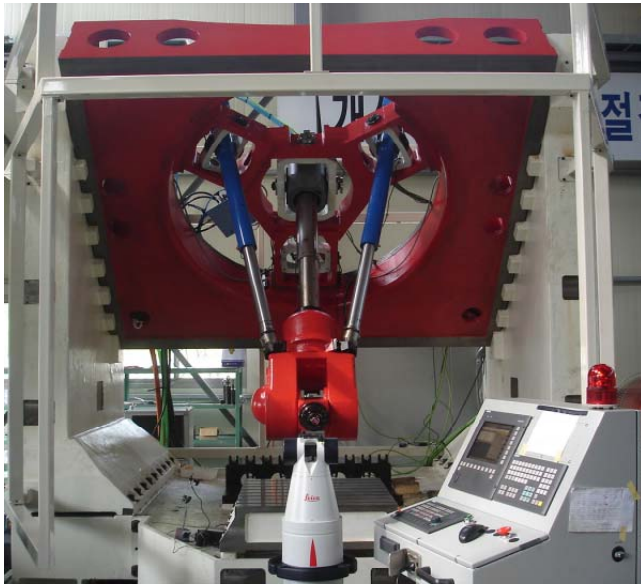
Prototype of a 5-axis hybrid machine tool.
